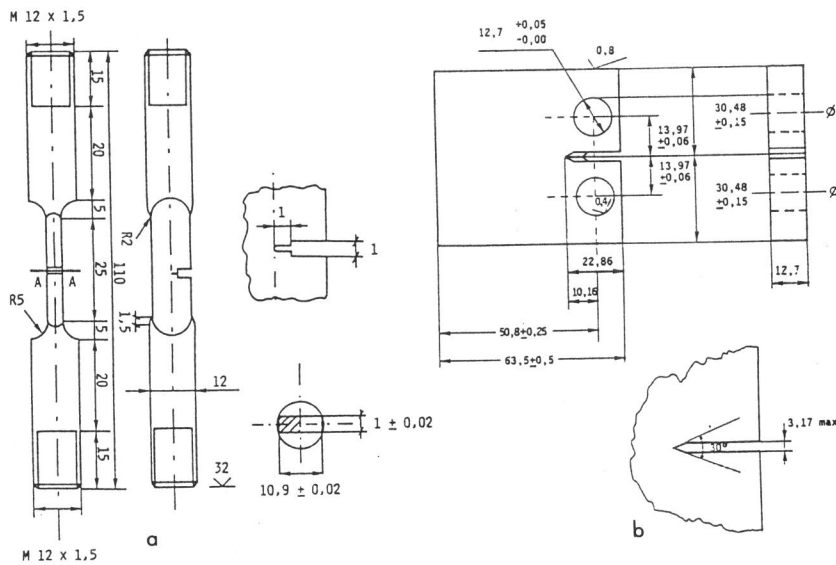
Specimen for a) stress corrosion cracking tests and b) fatigue tests.
